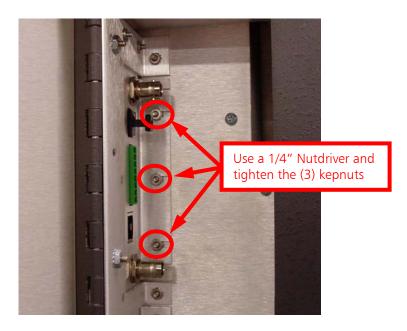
Tighten DSP Exciter Mounting Bracket Hardware
